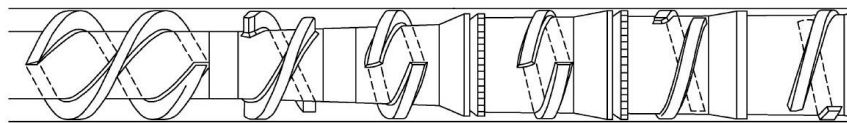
Single-screw press with a stepped screw and throttle washers
